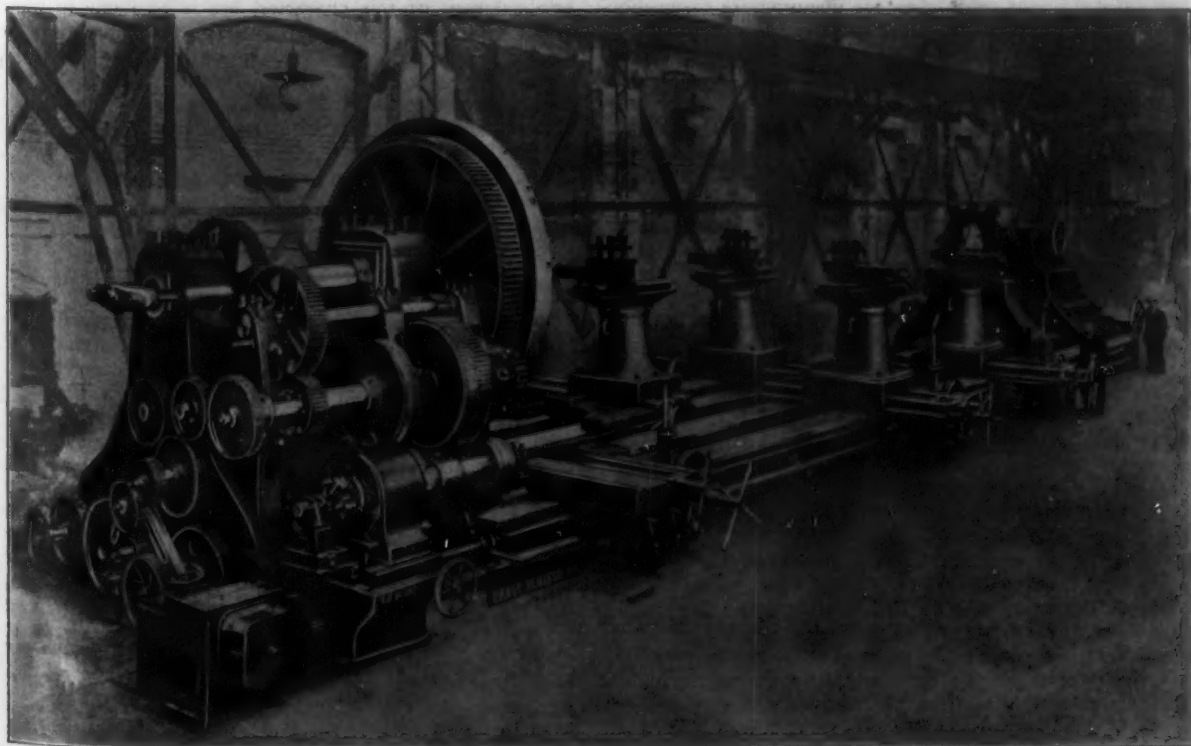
Lathe for Turbine Parts, 18 ft. in Diameter and Weighing 717,495 lb.
